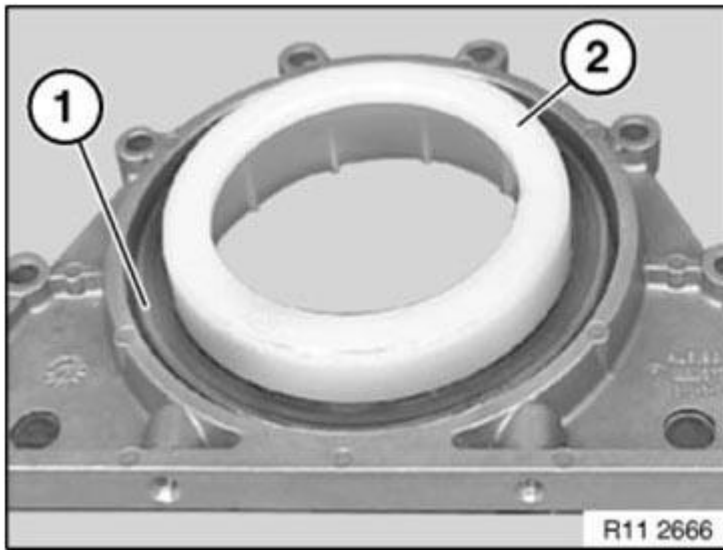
Identifying Support Bush And Radial Crankshaft Seal
